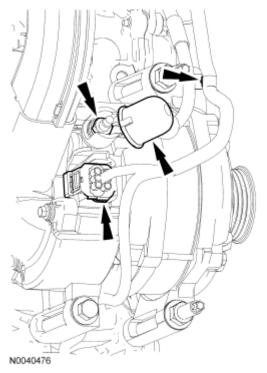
Locating Pin-Type Retainer And Generator Electrical Connections Courtesy of FORD MOTOR CO.
